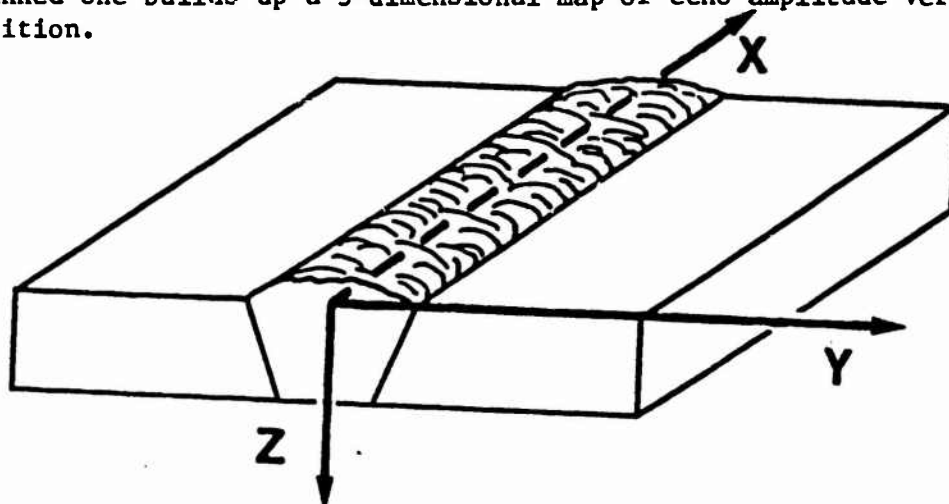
Assignment of Coordinates to a Weld.
